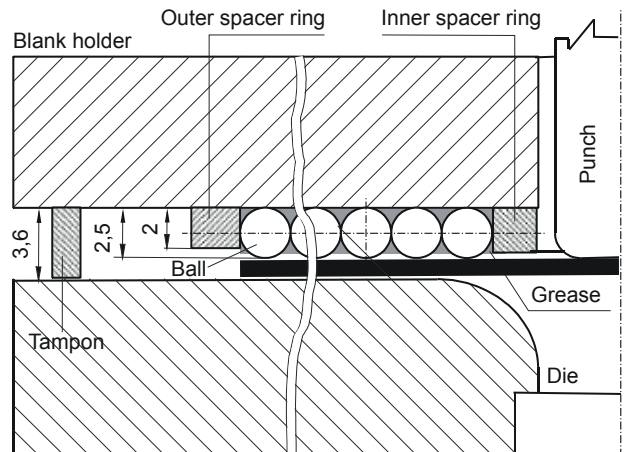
Dimensions and tooling geometry of multi-point blank holder
